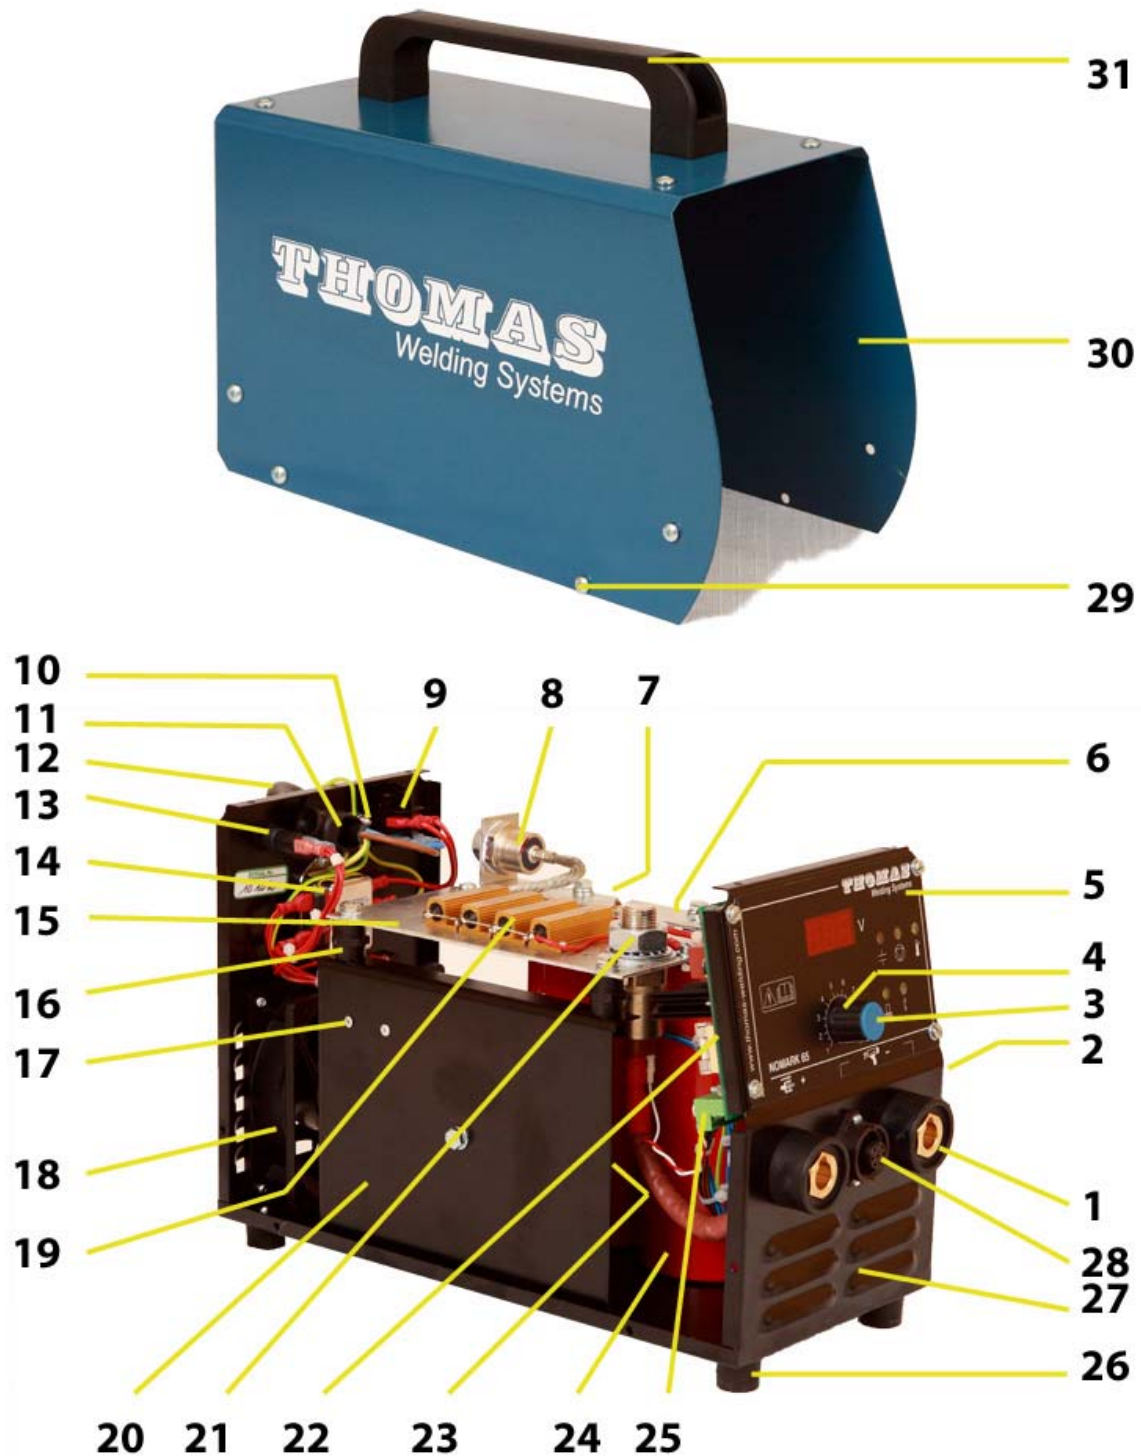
18 Explosion view NOMARK 65 / 99.
